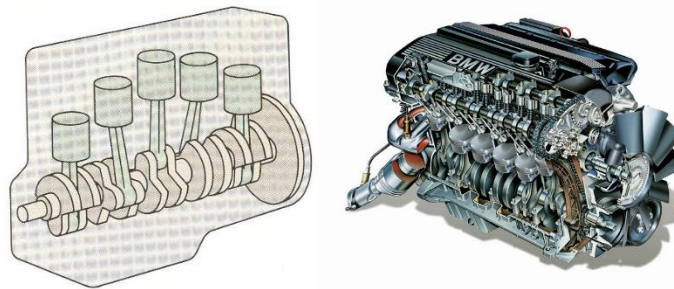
2002 BMW 5-Series Inline-6 Engine
